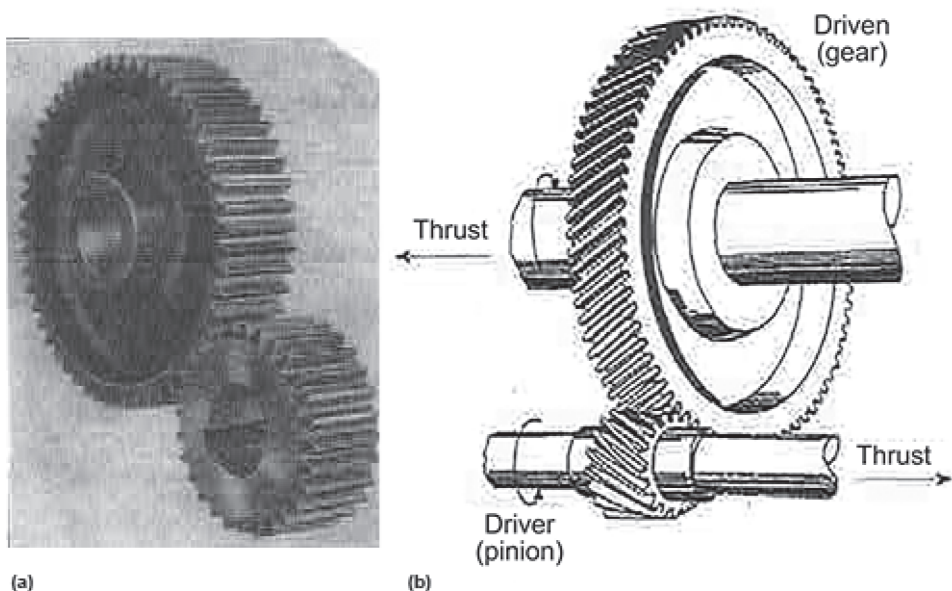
Gear and pinion; (a) spur, (b) helical
